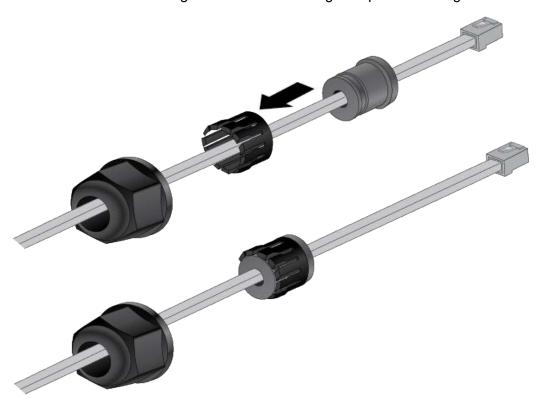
Inserting the Sealing Insert in the Clawing Clamp
